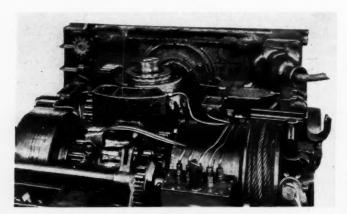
Gearing mechanism of early machine which has been redesigned to reduce the total overall height of the unit
